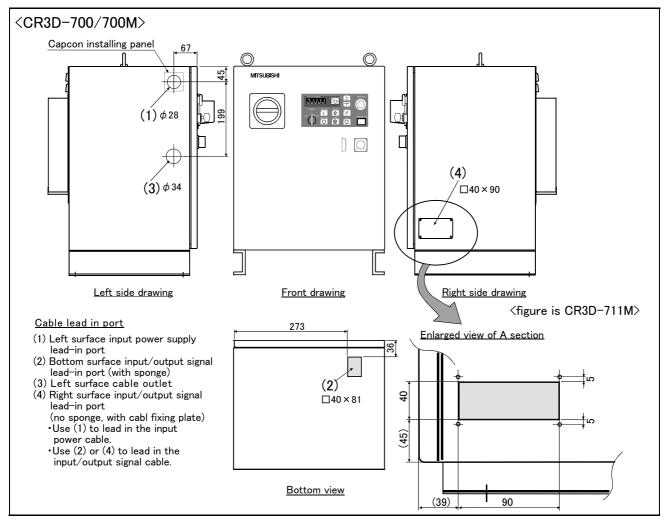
Cable lead-in and dimension of the controller (CR3D-700/700M)
